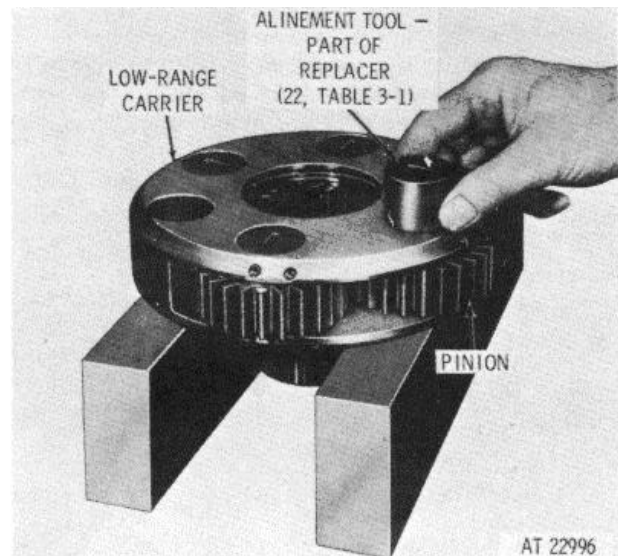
Alining pinion assembly in low-range planetary carrier.
